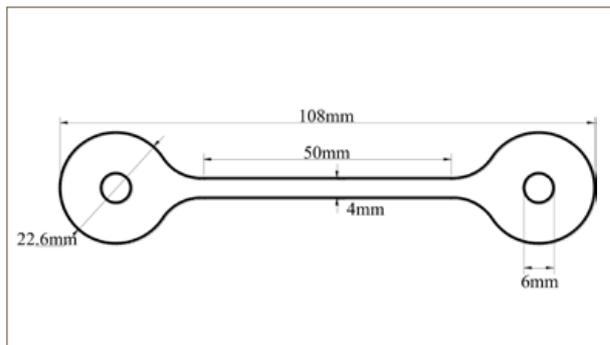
Geometry of injection moulded tensile test bars: Thickness = 2 mm
